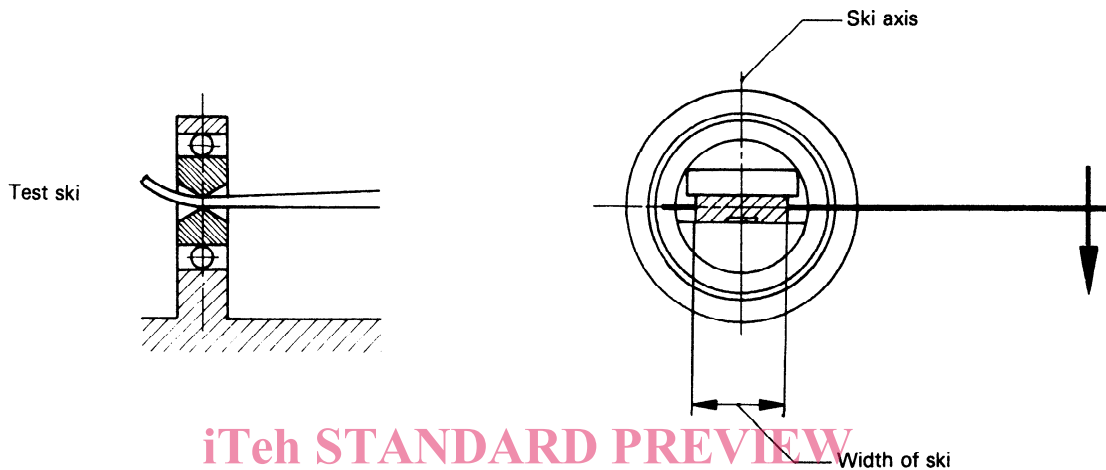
Clamping device for bending and torque-tests of alpine-ski — Minimal dimensions
